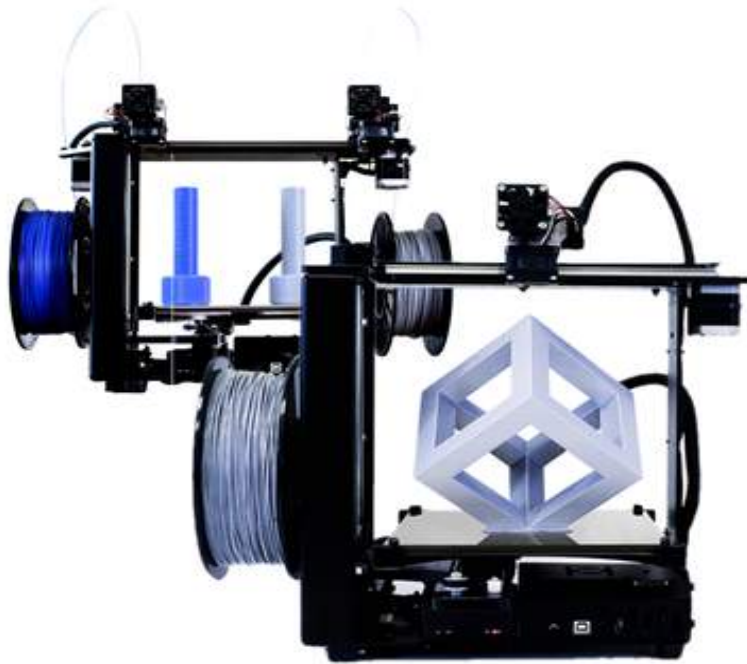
MakerGear M3-SE 3D printer. Source: MakerGear (2019).
